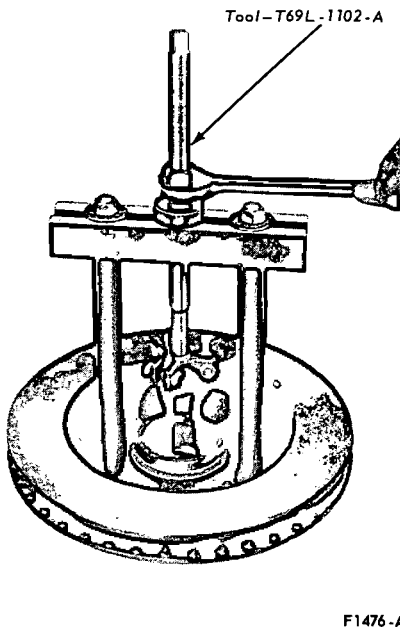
Removing Front Wheel Bearing Cups—Disc (Drum-Type Similar)
